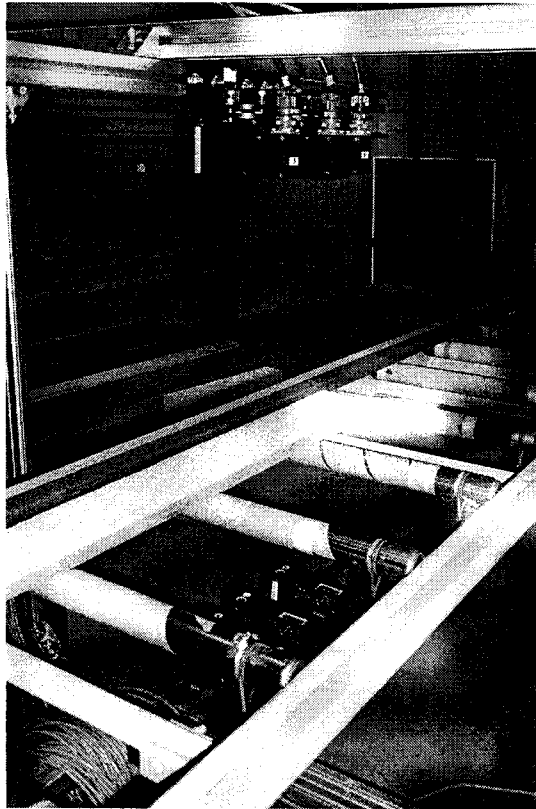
Multi-roller conveyor. Six sensors – Two sides set-up
